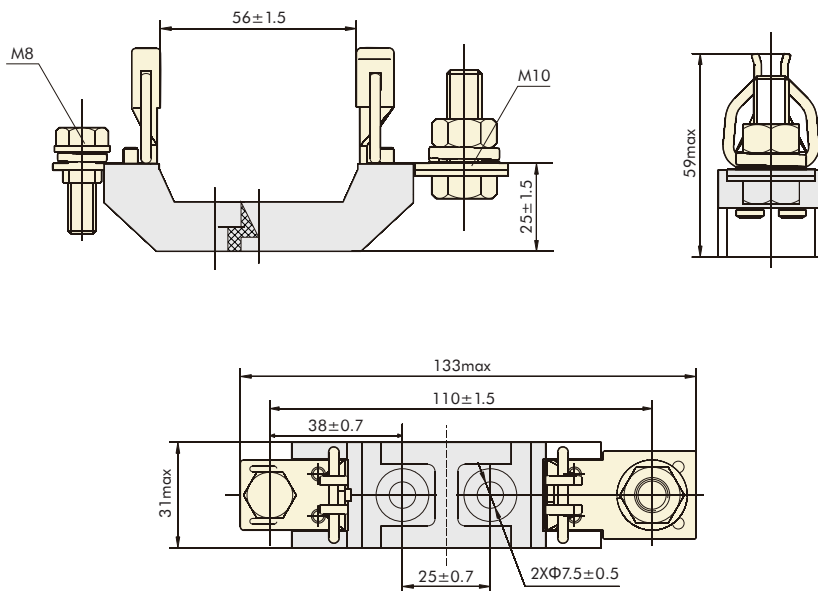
CRT36-00 600 Pedestal appearance and installation dimensions
